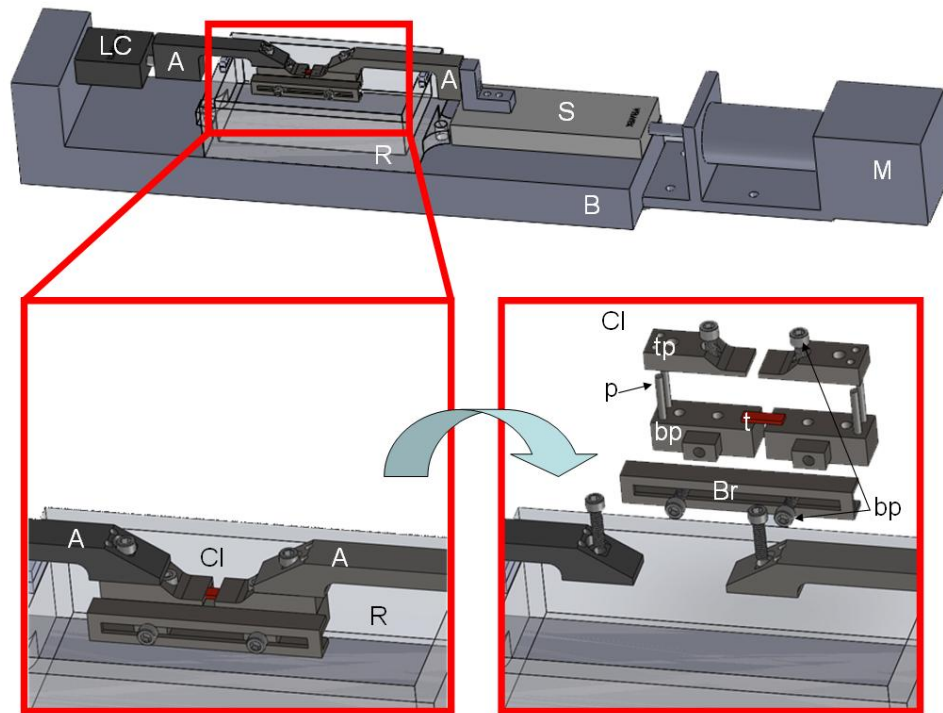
SolidWorks rendering of the physical components of the hUA-MPM testing system, with exploded views depicting the manner in which the specimen is clamped in the assembly and mounted onto the device. Parts are defined in the table above (NS = not shown).
